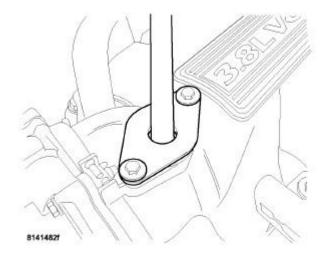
EGR TUBE AT INTAKE Courtesy of CHRYSLER LLC
